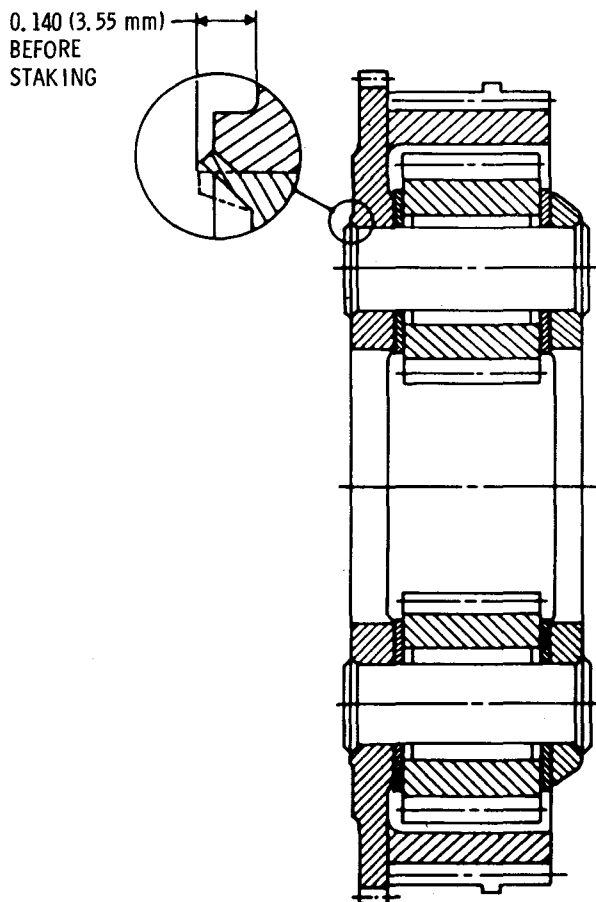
Reverse-range planetary carrier assembly—cross-section view
